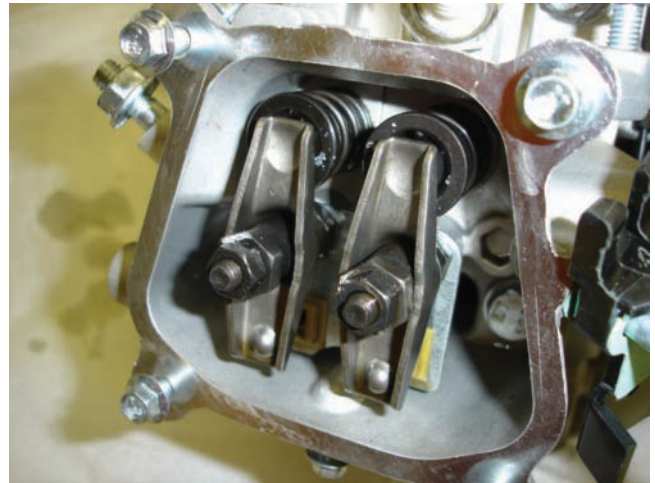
The top of a typical OHV power equipment engine. Note the valves, rocker arms, and nuts for adjustment.
